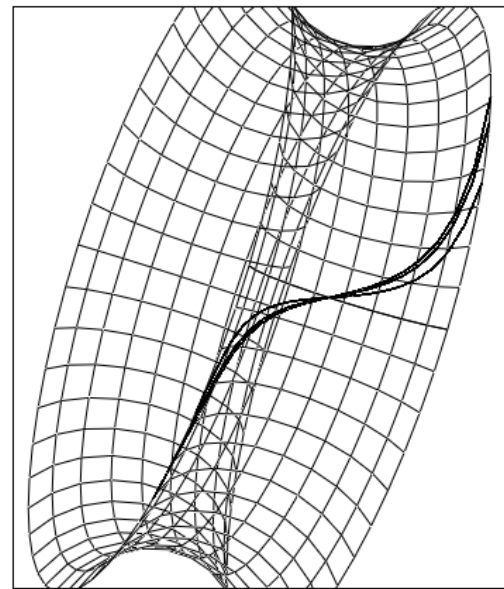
The contact line of the wheel and the workpiece at different angles of a wheel
